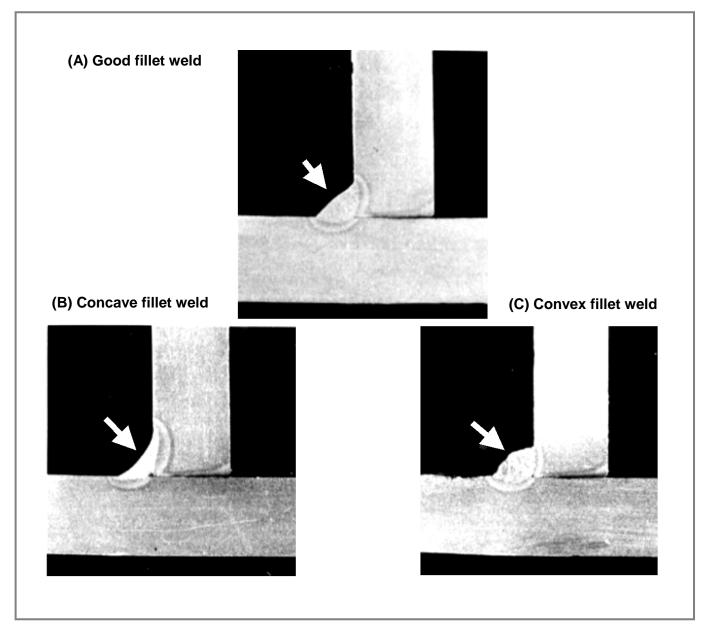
CONCAVE FILLET WELD, CONVEX FILLET WELD
